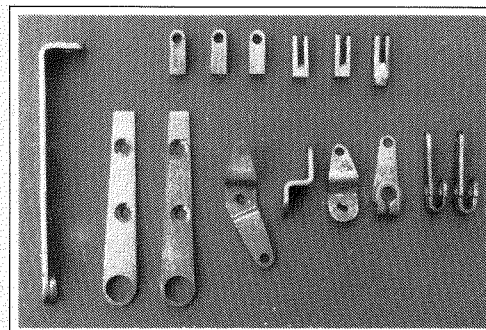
The linkages made up. From left to right:- The throttle and control shaft support brackets, the throttle and throttle spindle operating levers, the control shaft clamp levers and (top) the link end fittings
